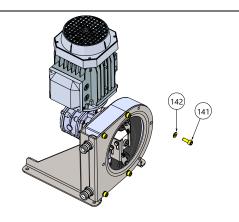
Unscrew the front connection bracket screws [141], and remove them with their washers [142].
